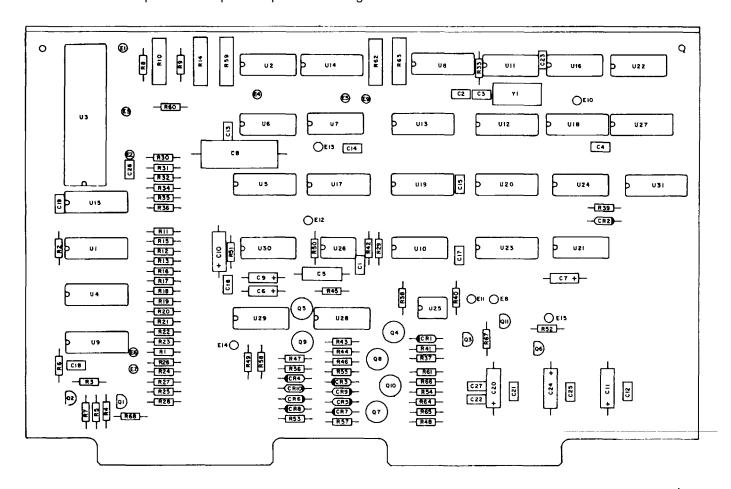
Operations Site (Remote) Modem Circuit Card Assembly, 4A3, Parts Location Diagram
